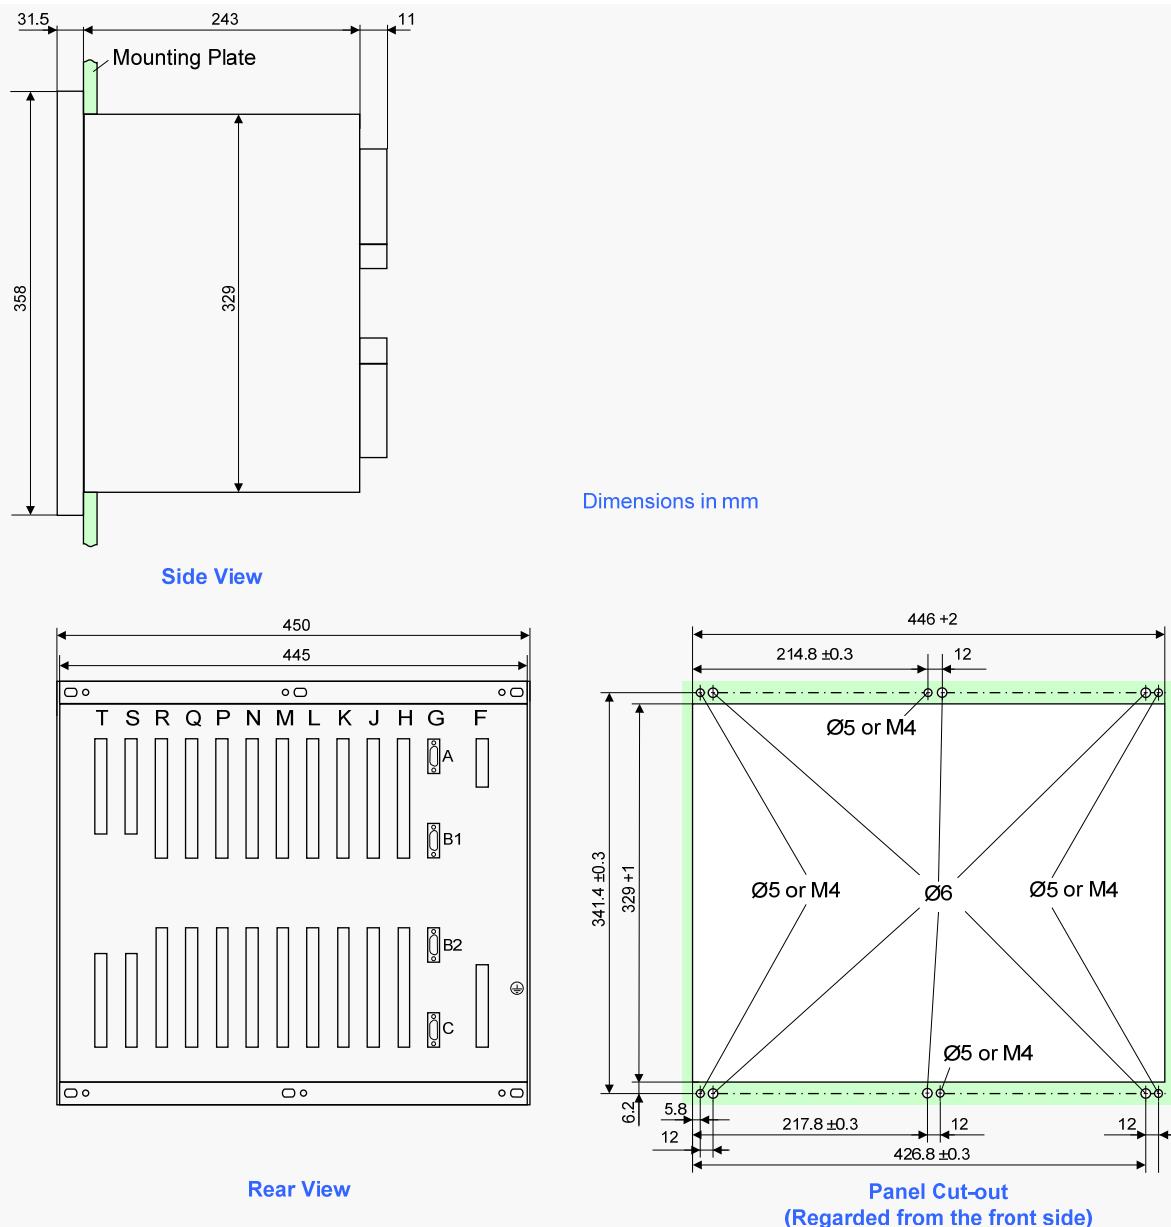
Dimensions of a 7UW5010 for panel flush mounting or cubicle installation
